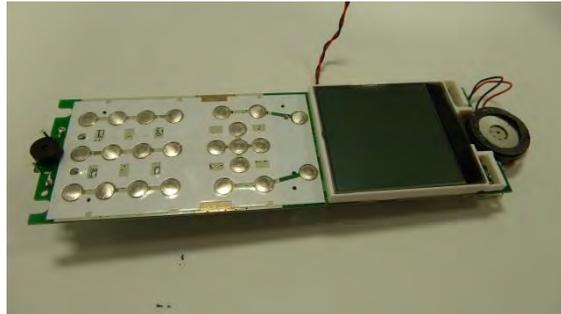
Front of PCB showing LCD screen and frame and switch pads for buttons
